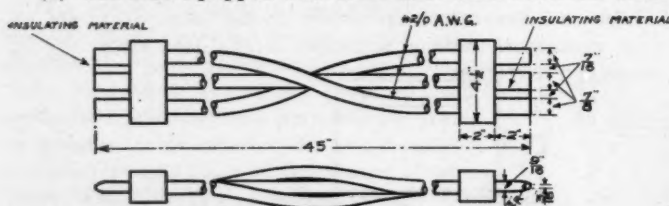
3G Train Line Connector (3 Wire for Head End System)
